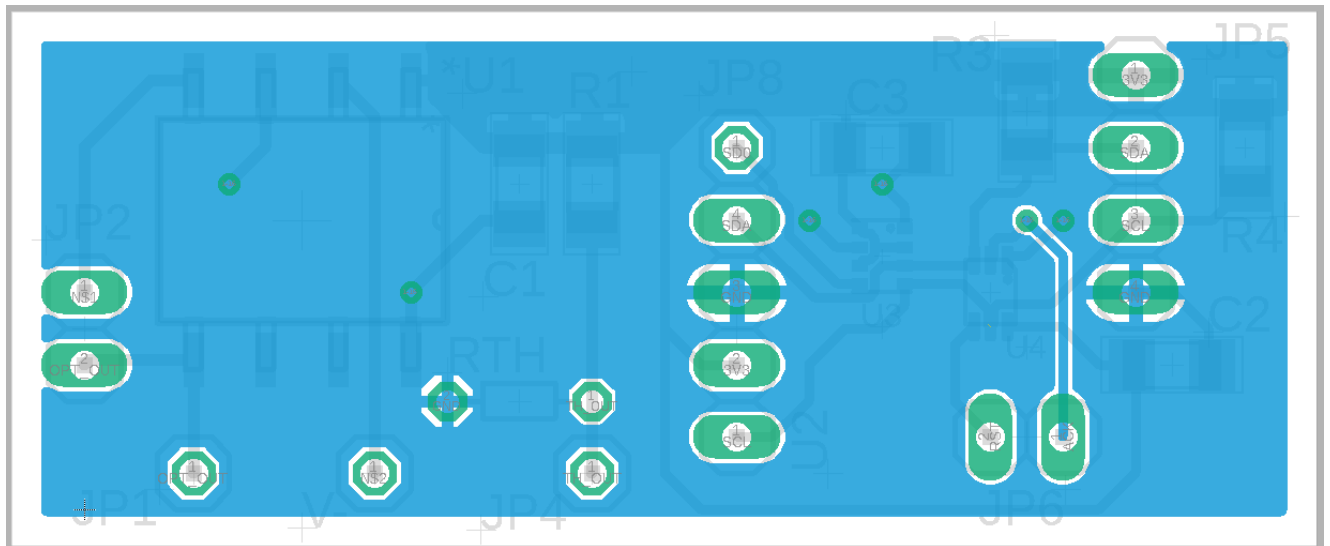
Bottom Layer Board Layout for Outside Sensor Module
